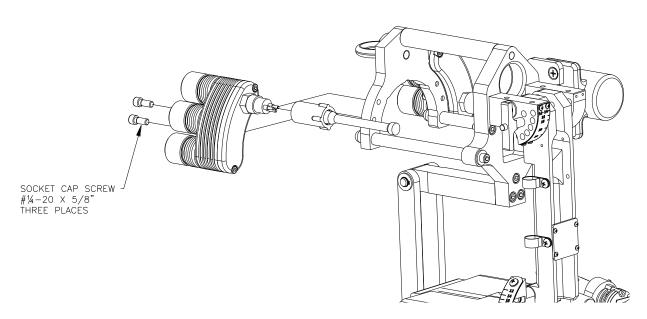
LIGHT INSTALLATION & ADJUSTMENT
